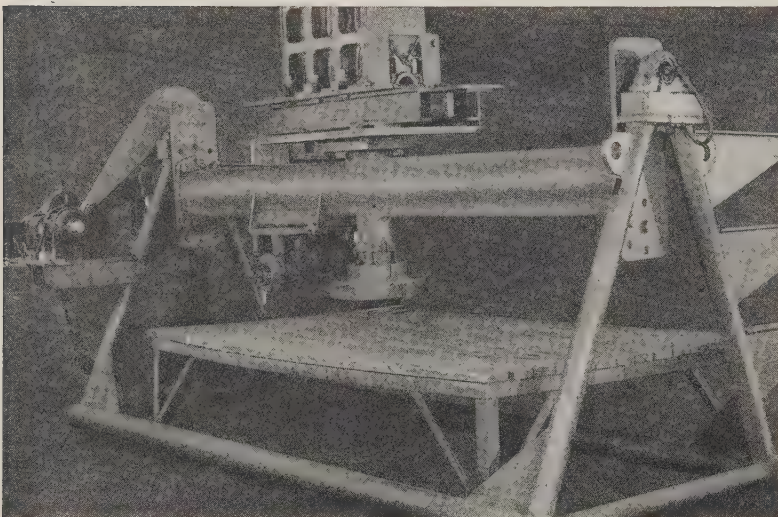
APPLICATION OF WELDED TUBULAR STRUCTURE
